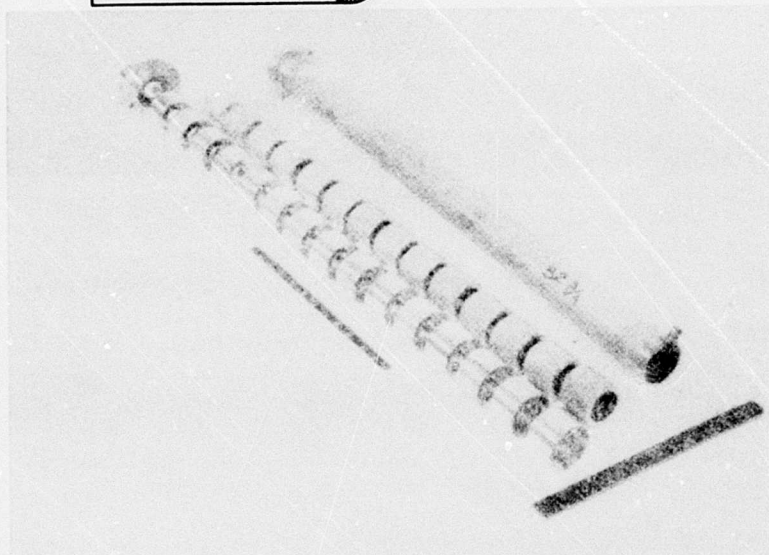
Shock-Tube Long Suppressor Assembly Showing Inserts with Filler Spacers for Making 1/4-inch Cavity Depth and 1-inch Baffle Openings
